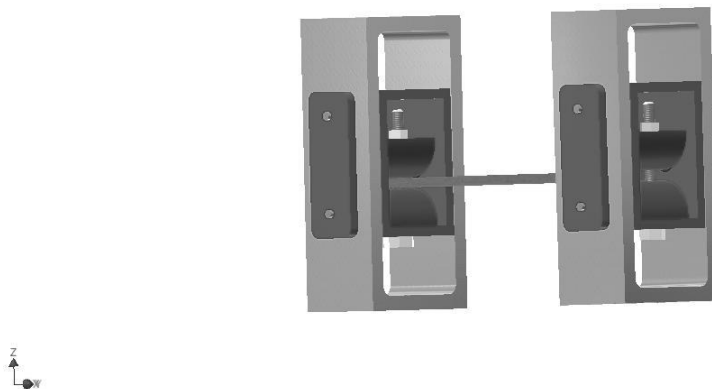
Initial proposed design of a 4-point fully reversed bending set-up with rotating side supports.
